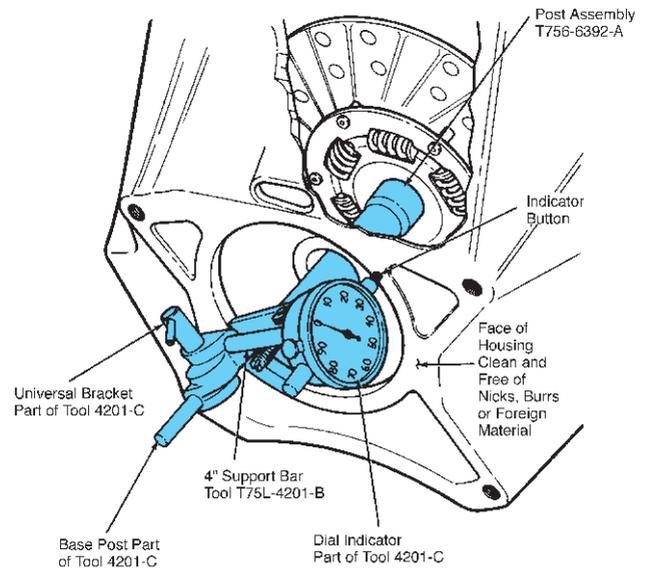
A dial indicator is mounted to the clutch disc or the pressure plate assembly and the crankshaft is rotated to check for runout at the face of the clutch housing. It can also be mounted to the crankshaft to check for runout of the clutch housing surface. (Courtesy of Ford Motor Company)
